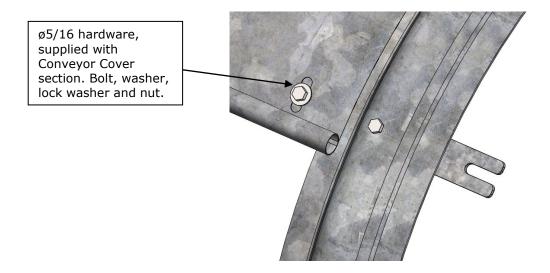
3/4 COVER ATTACHMENT TO RETAINER SUPPORT BRACKET
